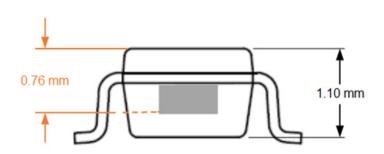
XtremeSense TMR Sensor Location in z Dimension for CT100 in SOT23-6 Package
